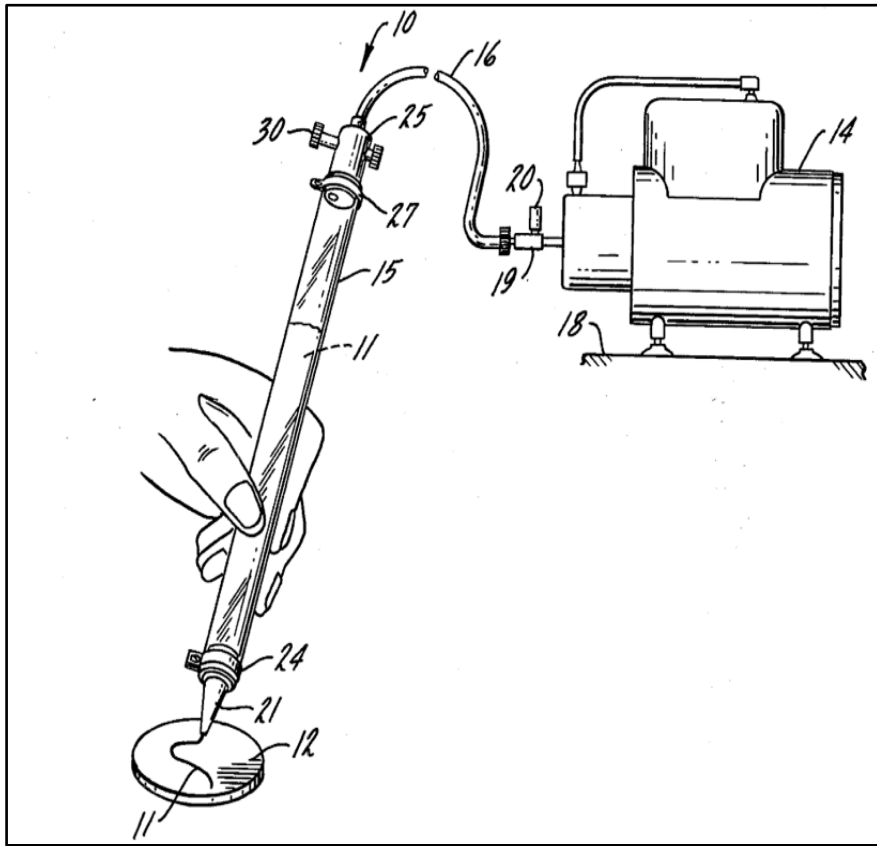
Piston-type Extruder by Robert A. Bemm [36]
